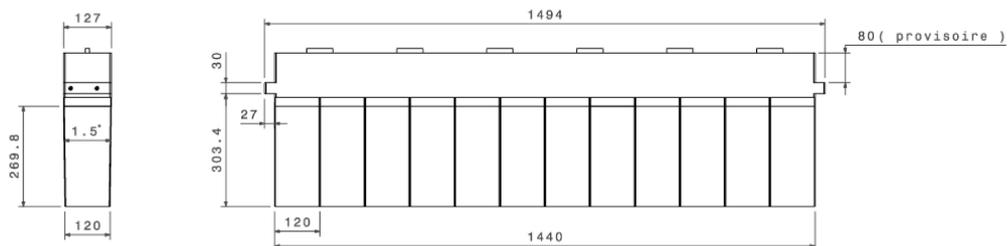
Strip module layout showing dimensions and the 1.5 degree taper.
